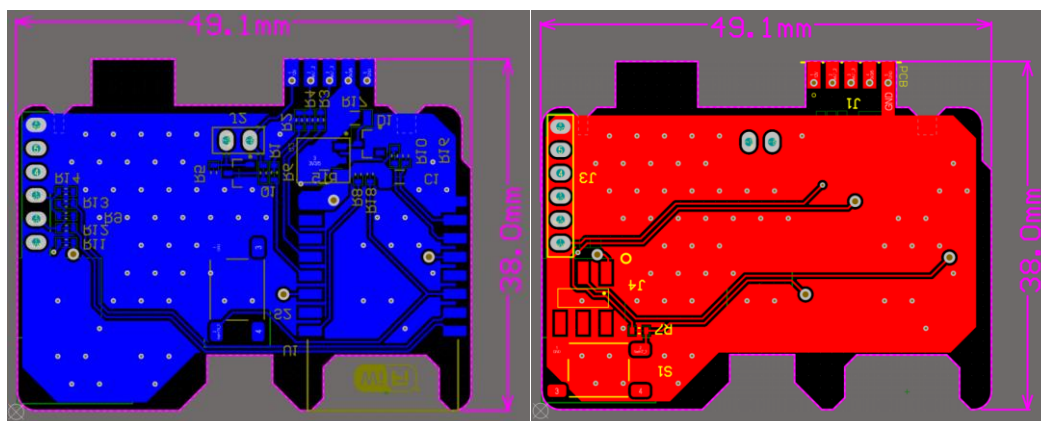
PCB ESP8266 bottom layer (blue) and top layer (red).
